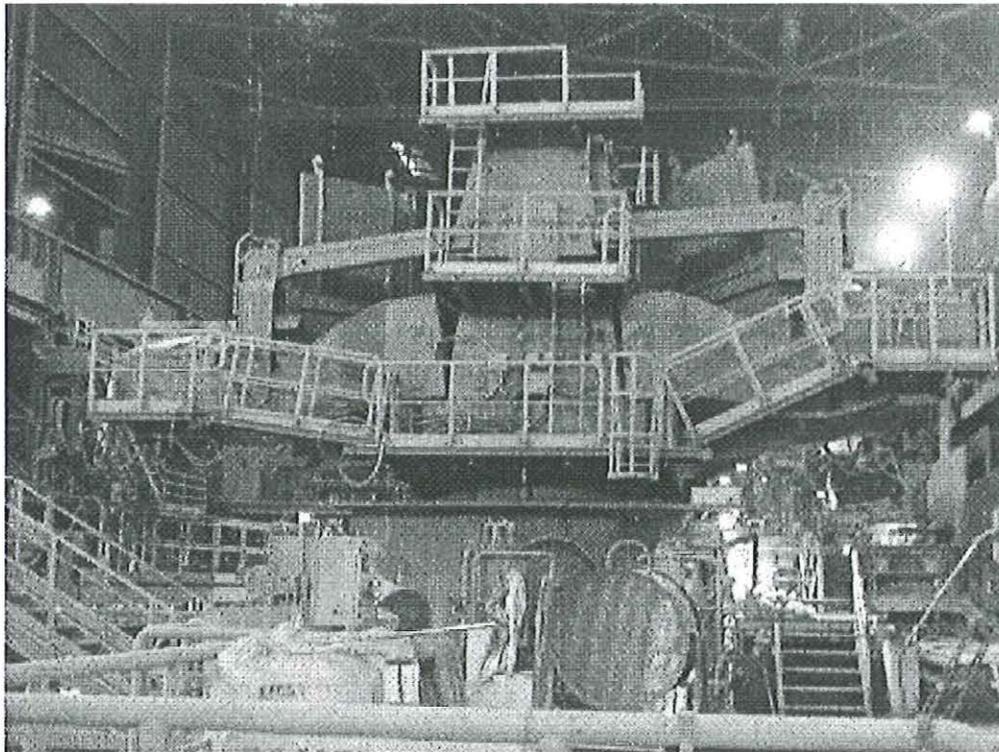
(DSC00089) : Photo of Caster with twin turrets which rotate to receive molten metal to be cast into billets
